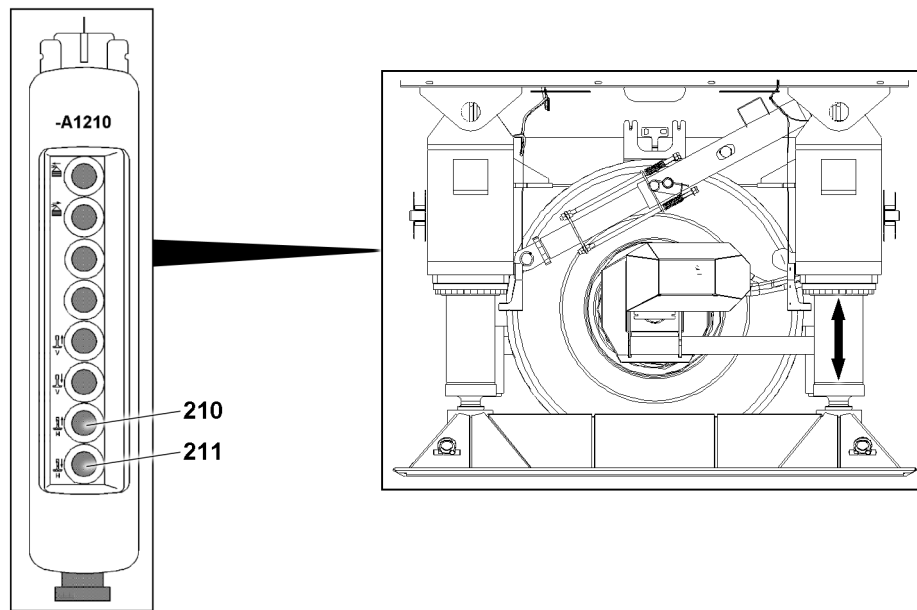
Retract or extend the support cylinder to the rear using the control panel -A1210.
